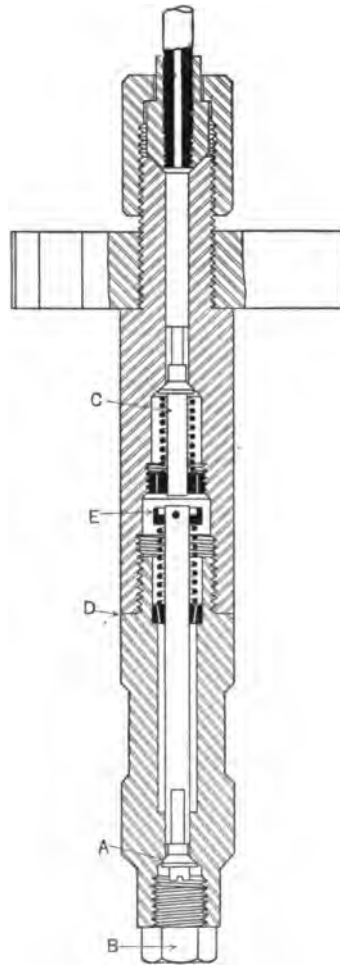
Fuel nozzle, Buckeye-Barrett oil engine.
